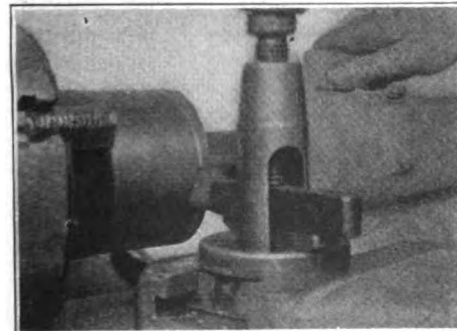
Facing Interface of Ring With Left-Hand Side Tool.
